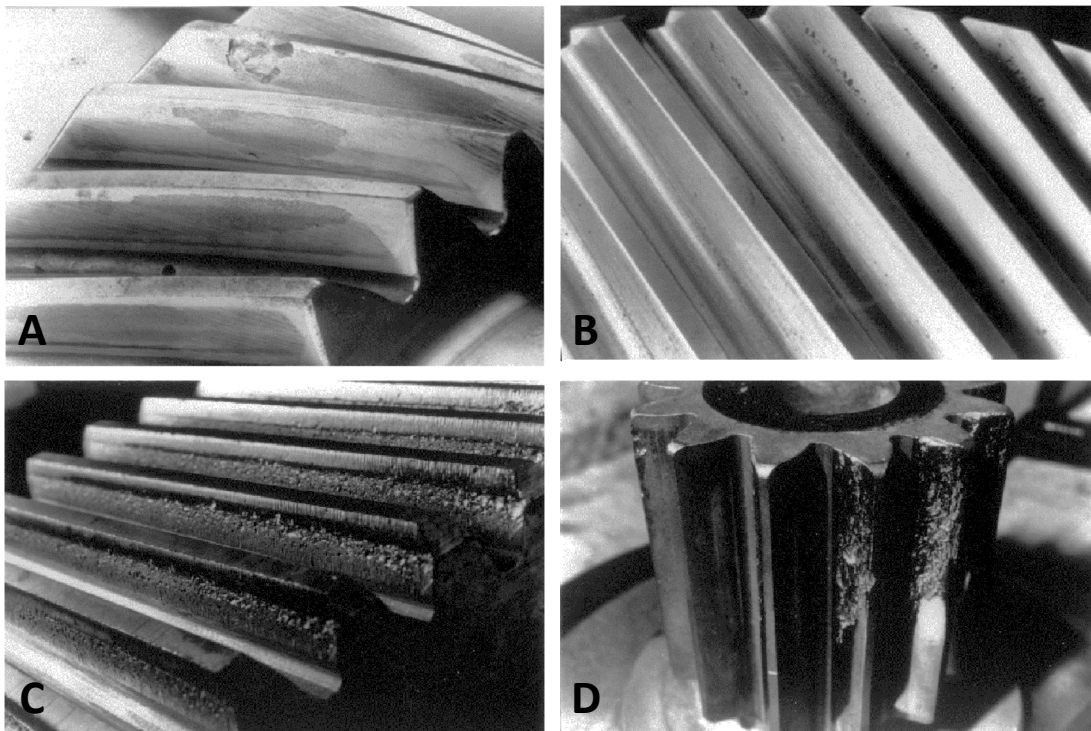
(A) Micropitting. (B) Initial pitting. (C) Progressive pitting. (D) Spalling. Extracted from ANSI/AGMA 1010-E95, Appearance of Gear Teeth Terminology of Wear and Failure, with the permission of the publisher, the American Gear Manufacturers Association, 1500 King Street, Suite 201, Alexandria, Virginia 22314.
